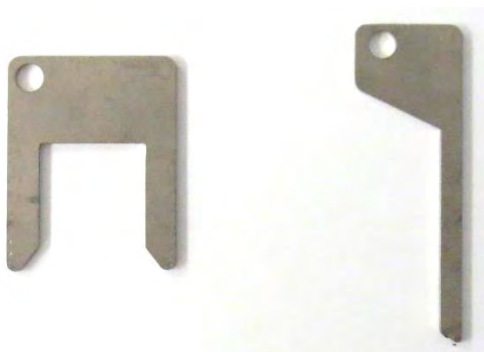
Lifting plates for 30mm and 35mm pin sizes
